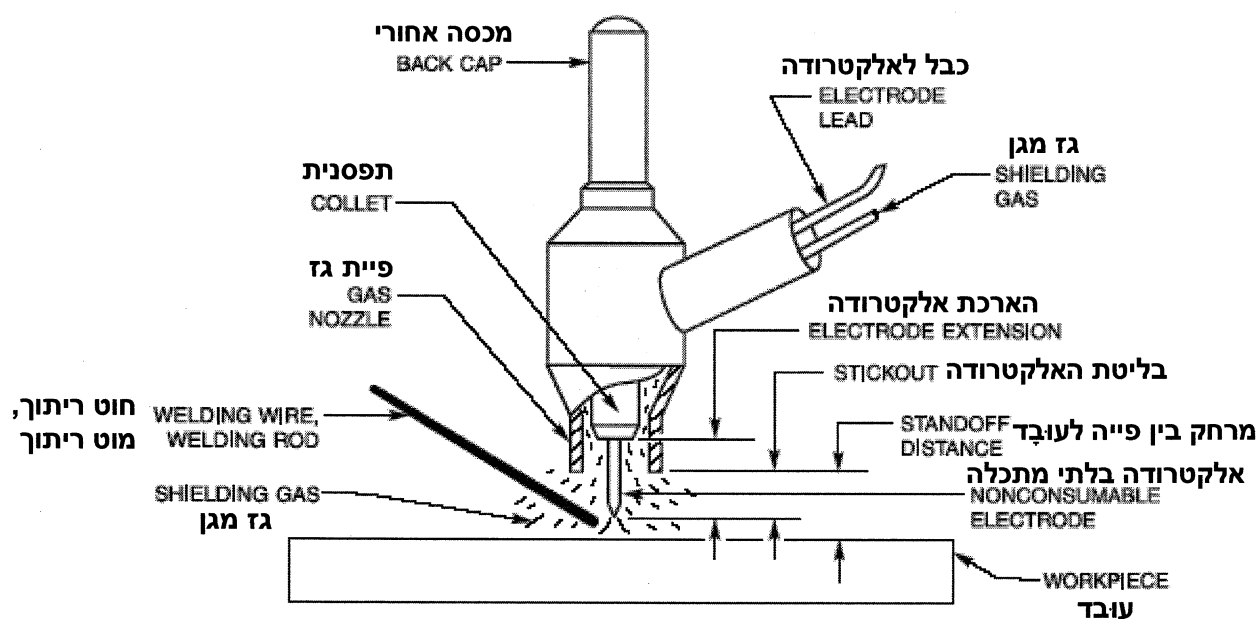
Gas Tungsten Arc Welding Torch Nomenclature
